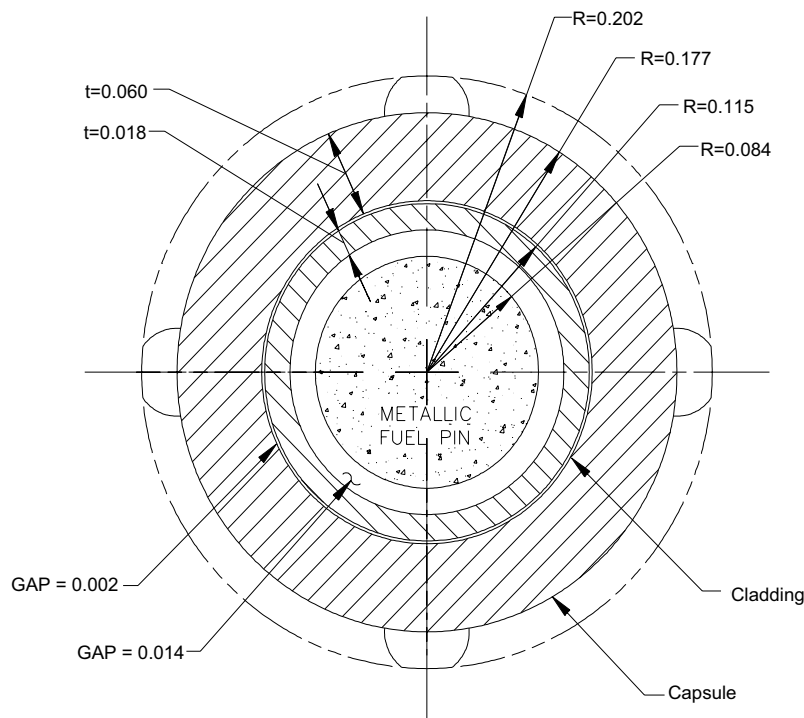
Radial dimensions of capsule and fuel rodlet assemblies for the AFC-2A & B metallic fuel tests.
